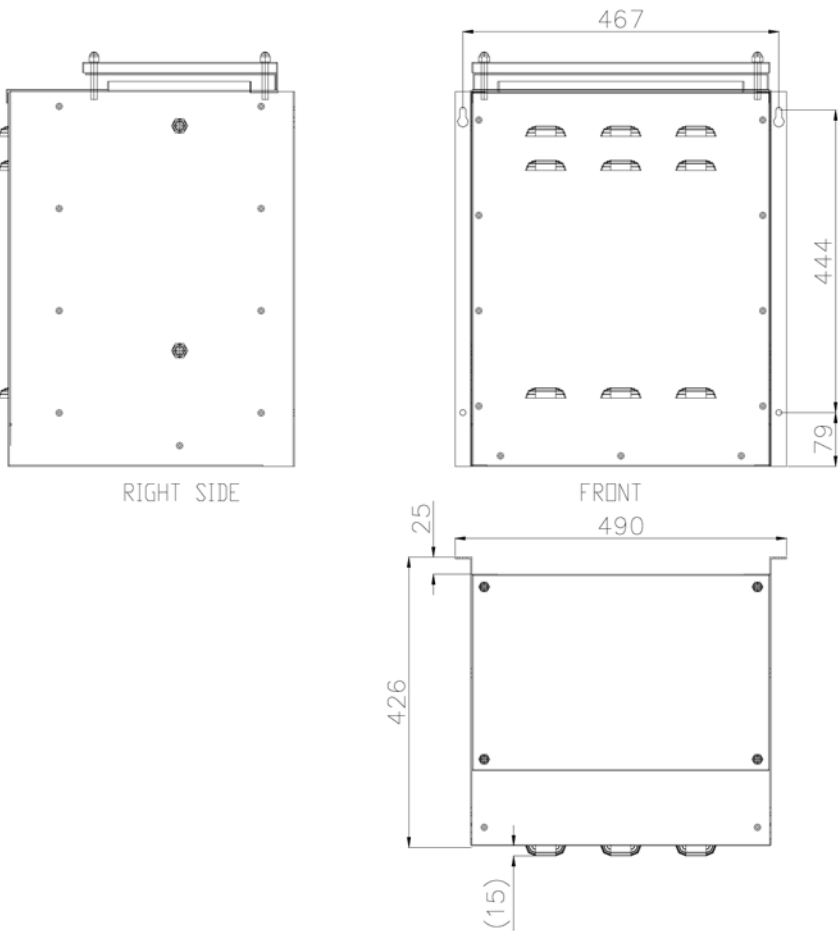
Typical dimensions of the steering brake resistor for Azipod CZ
